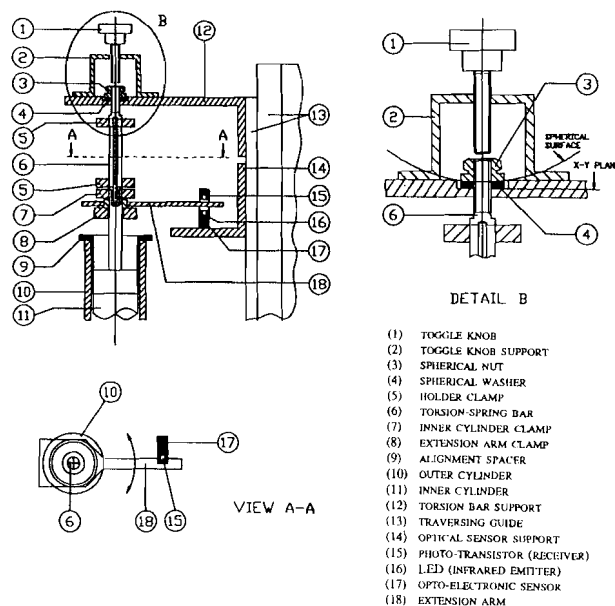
Alignment and inner-cylinder torsion-bar assembly.
